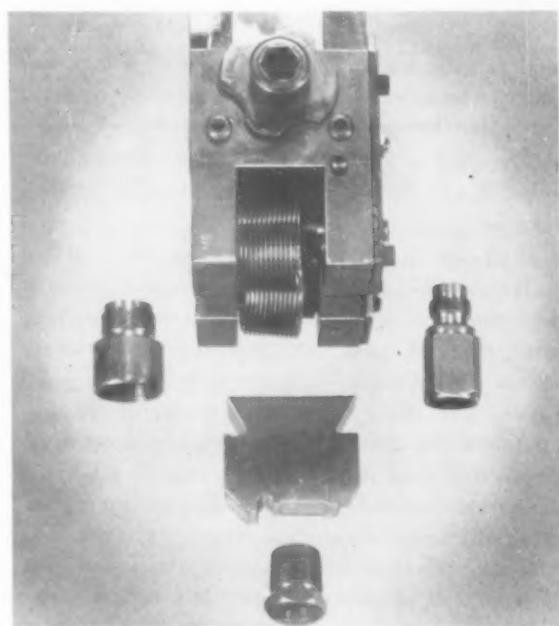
Thread rolls and holder for rolling threads on automatic machinery.
